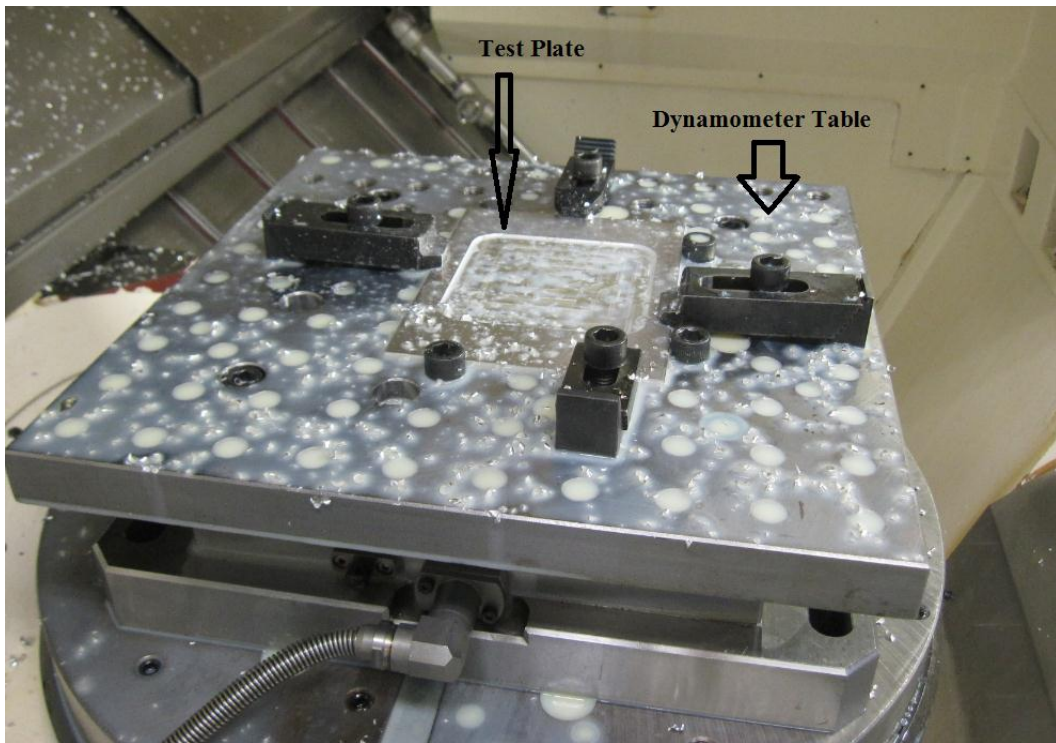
Test sheet after pocket milling on the machine and dynamometer table
